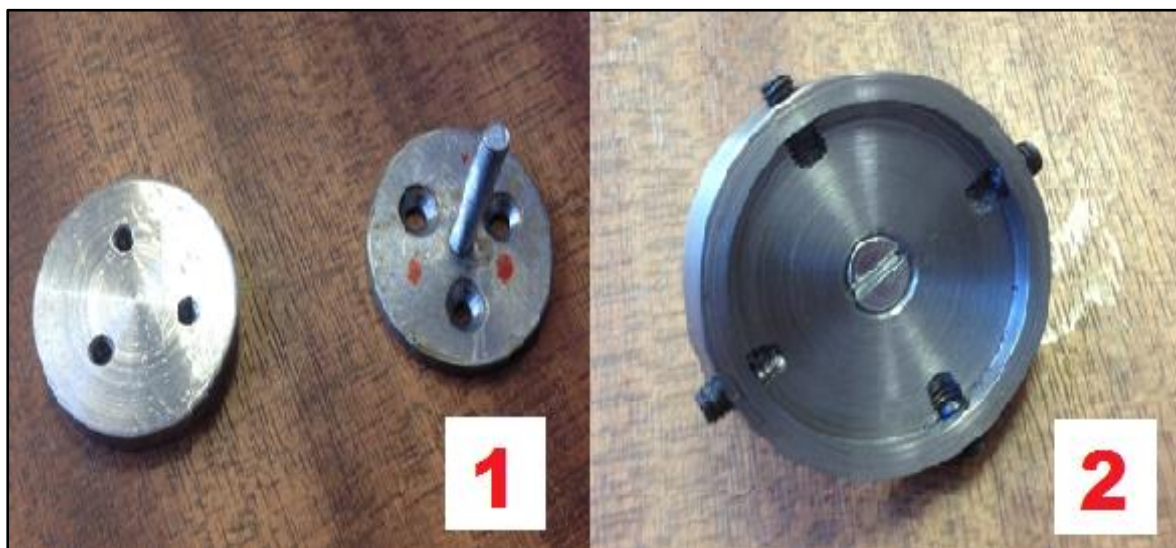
a) Test specimen holder design No. 1 b) Test specimen holder design No. 2
